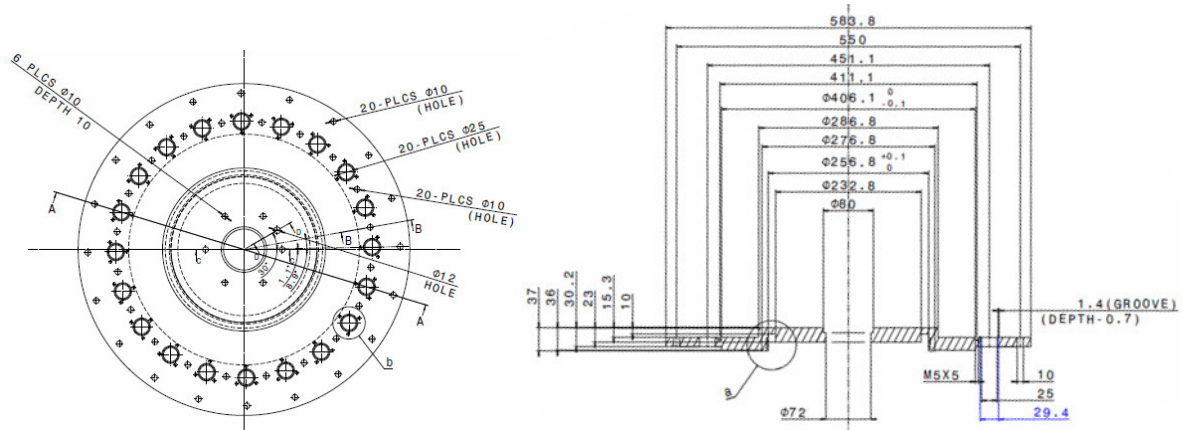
TTL Existing Top Cover; 2D Drawing (5)
